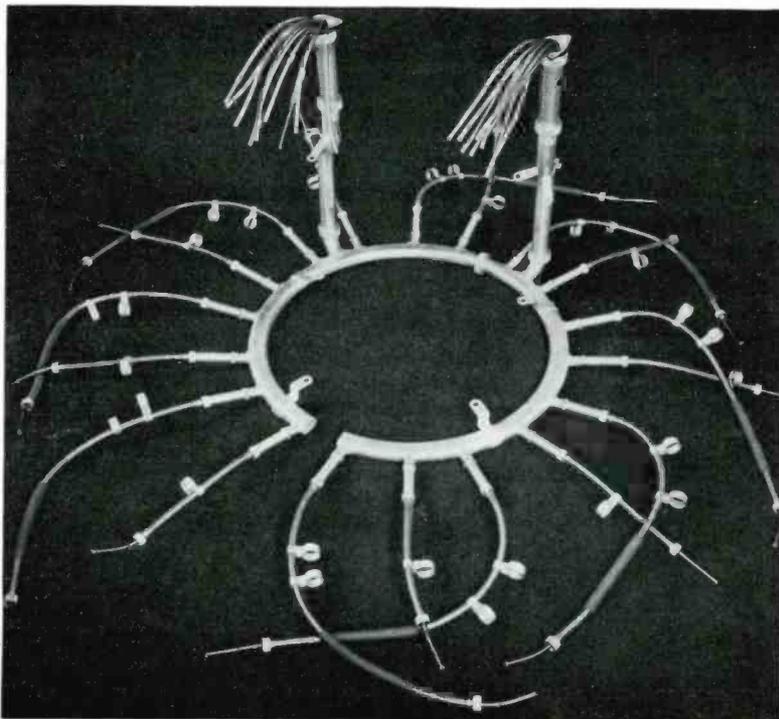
SHIELDING ASSEMBLY USED ON THE IGNITION SYSTEM OF THE WRIGHT D-1820
